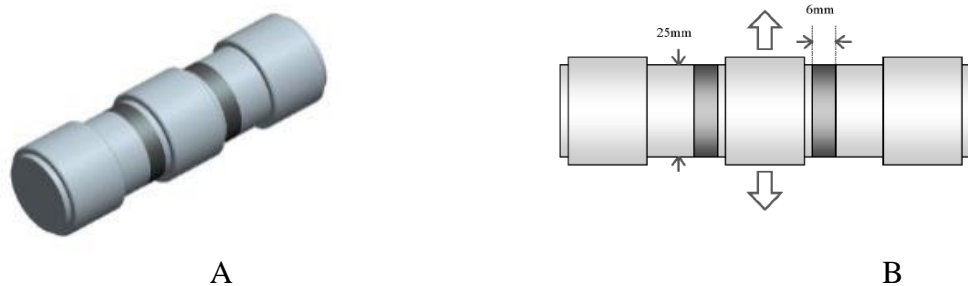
Simple Shear specimen: A) Cylindrical double shear test piece. In black, two rubber cylinders of 25mm diameter and 6 mm thickness sandwiched between three metal end pieces. B) The two metal end pieces are fixed and the central piece is moved along the direction shown by the arrows (Figure taken from [147]).
